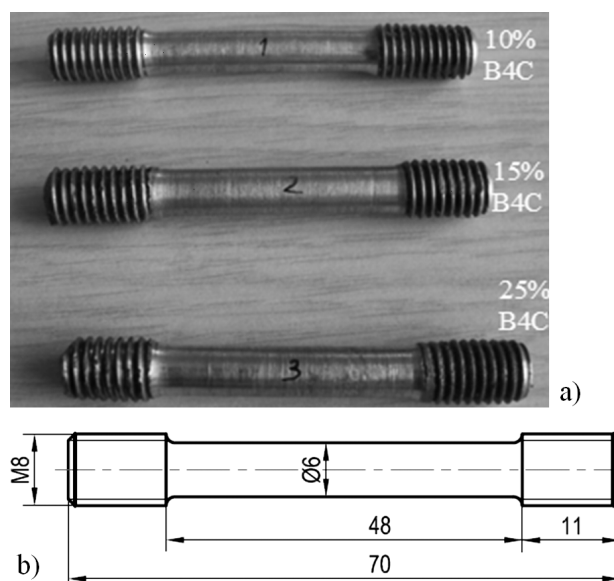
Tensile-test specimens: a) prepared test specimens, b) technical drawing of a test specimen
